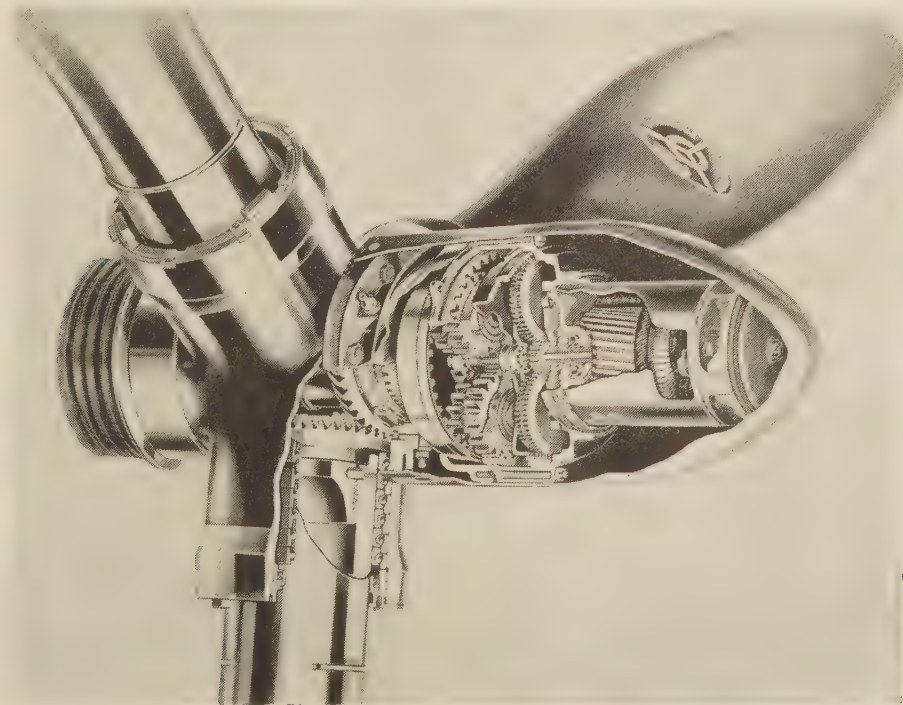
SECTIONAL VIEW SHOWING CONTROL MECHANISMS OF ELECTRICAL VARIABLE-PITCH PROPELLER
